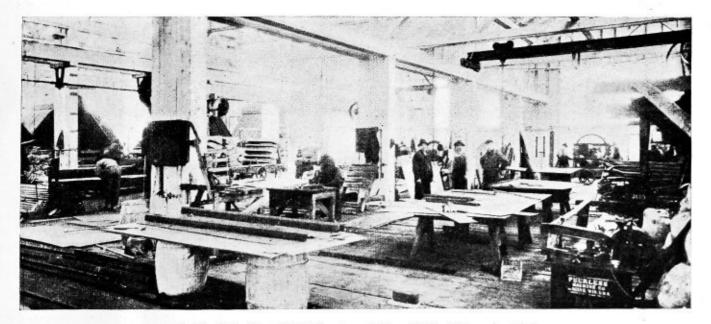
Light Sheet Metal Department, Where Boiler Casings Are Made
